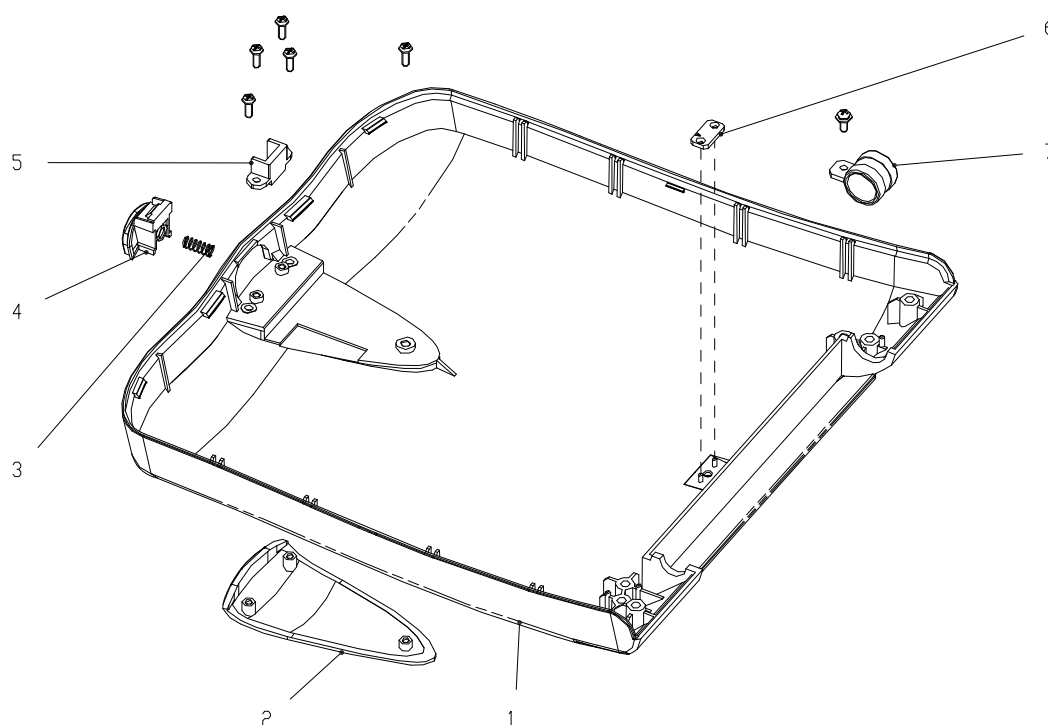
Exploded View of Bottom Cover Keyboard Assembly
